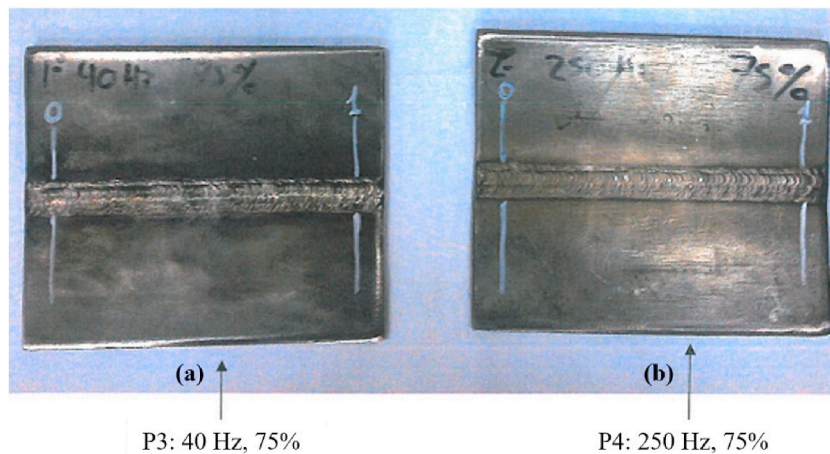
Photographs of weld bead: (a) 40 Hz, 75% and (b) 250 Hz, 75%.
